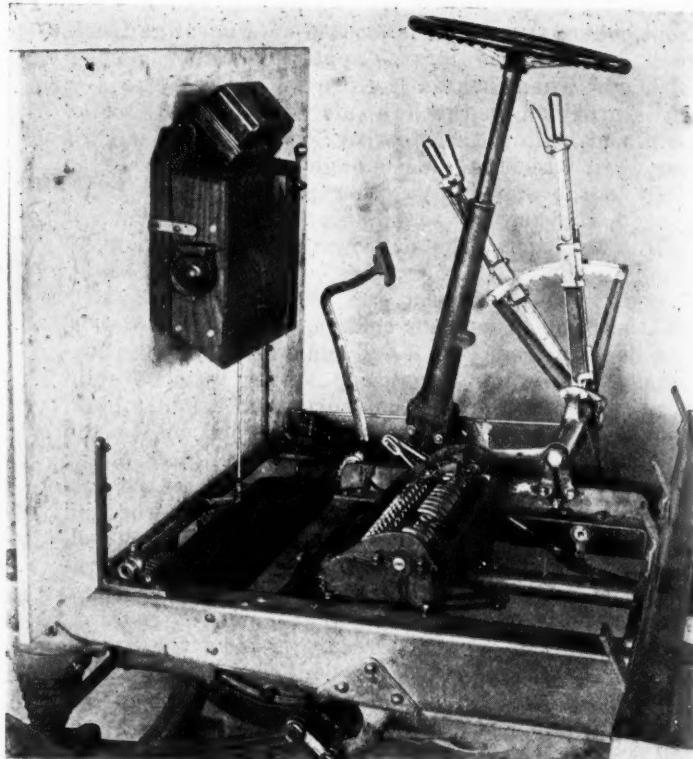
Arrangement of controller drum and linkage on the N. A. G. truck
